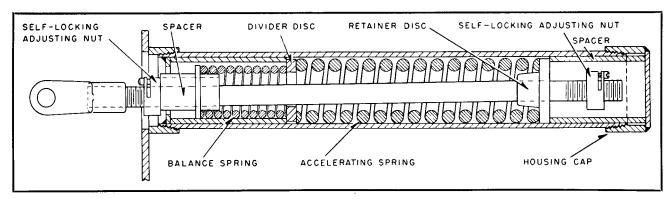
Accelerating Spring Used with Solenoid Mechanism
